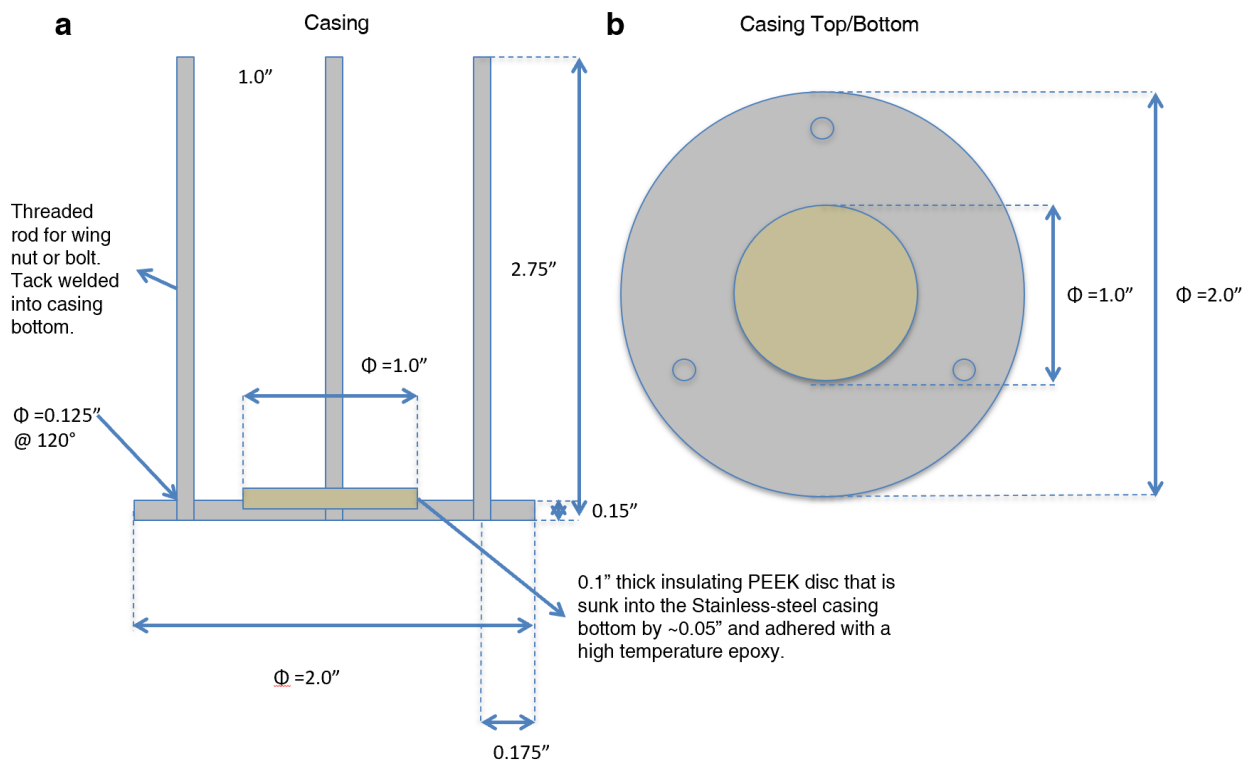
Dimensions for the casing for the split cell and load cell. a) Side view of the casing rods and bottom; b) Top view of the Top and Bottom of the casing.
